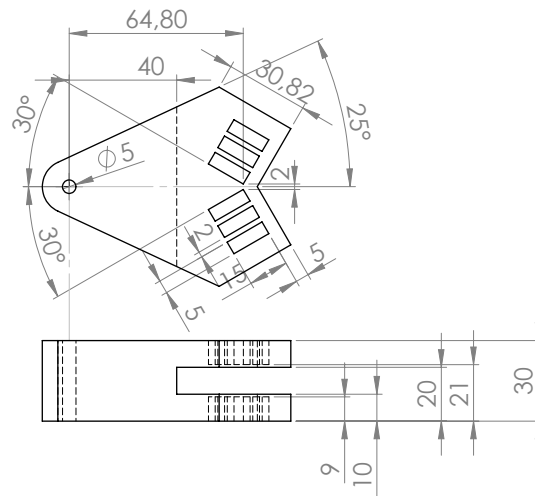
Dimensions of the internal part of repulsive moment-arm design. Dimensions in mm.
